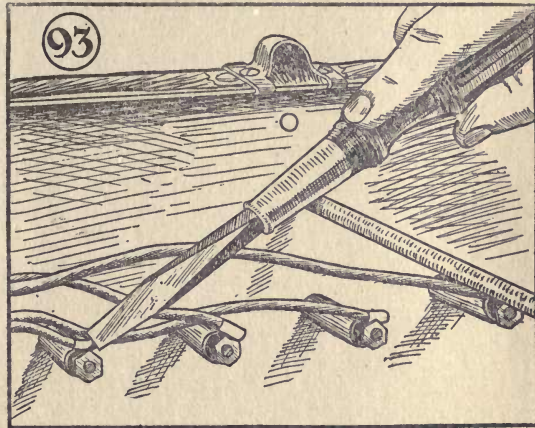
The terminals of the coil units can be conveniently shorted to the radiator stay rod with a screwdriver
